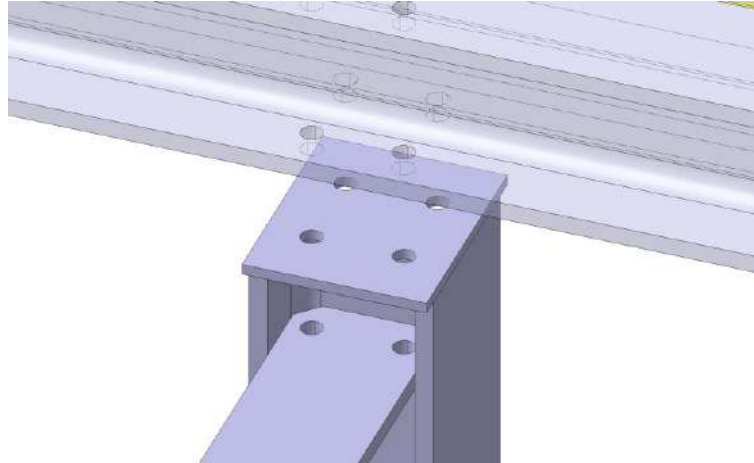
The supporting plates' connection to the feet and the railing system beams.
